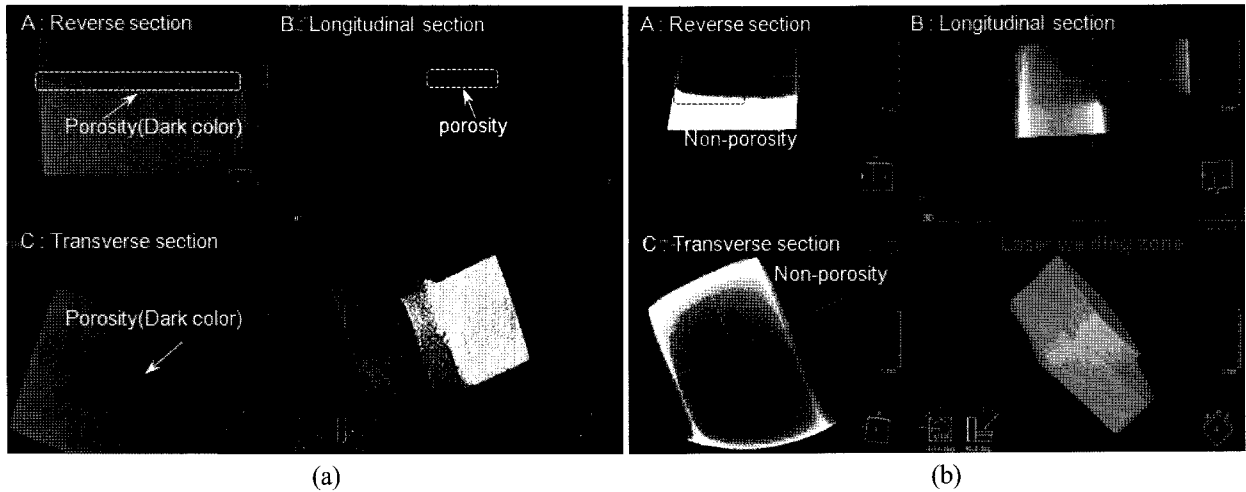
Perspective of X-ray CT scan for melting zone after E-beam and laser welding of gear part
